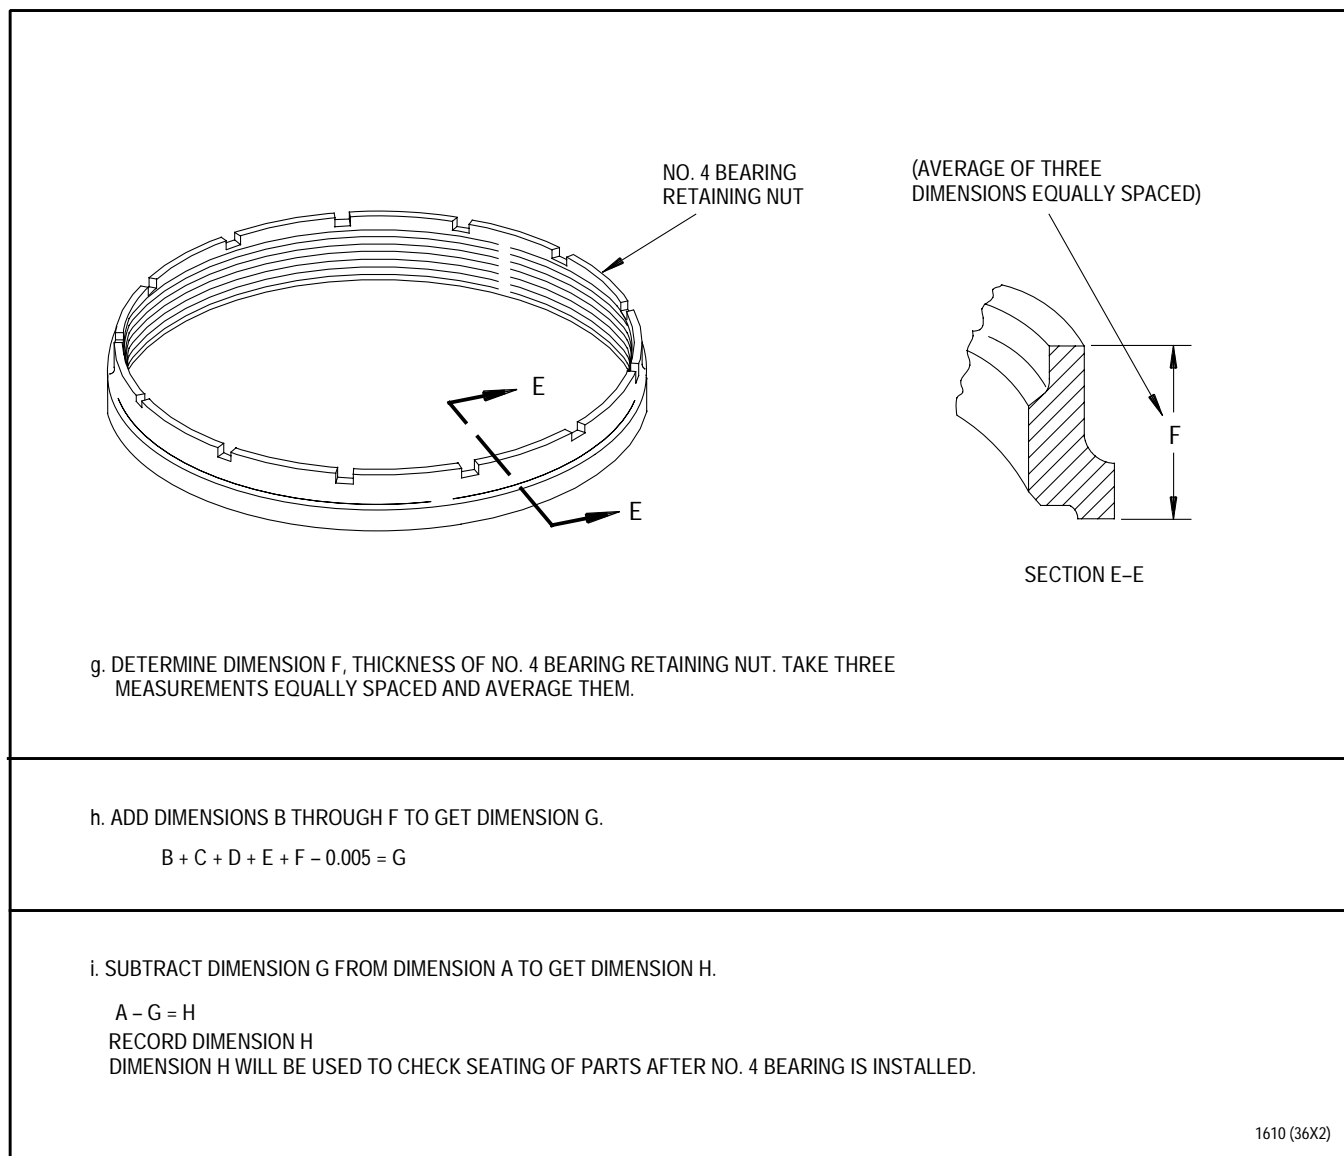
No. 4 Bearing Area - Measurement of Parts Before Installation (Sheet 3 of 3)
